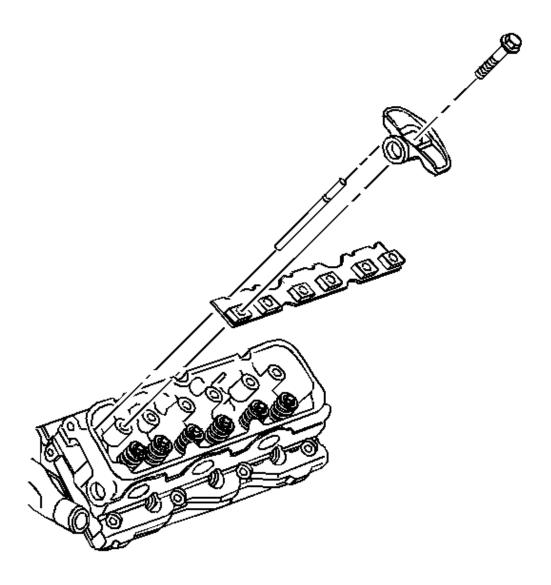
View Of Valve Rocker Arm, Bolt, Push Rod & Push Rod Guide Plate Courtesy of GENERAL MOTORS CORP.
